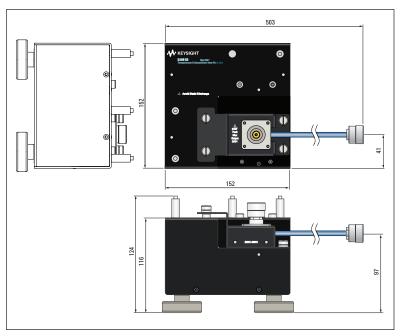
Option E4991B-007 test head dimensions (in millimeters)
